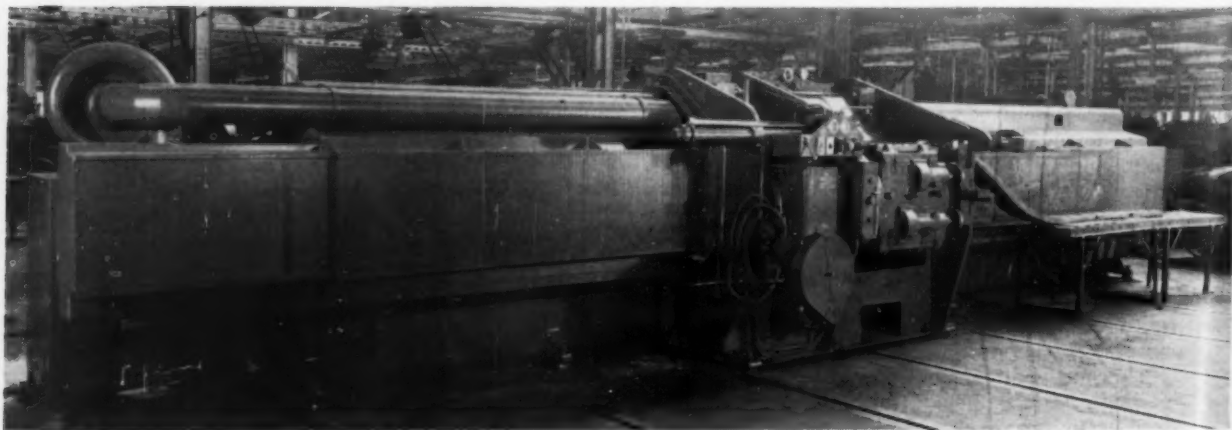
HORIZONTAL BROACHING MACHINE FOR BROACHING BOLT BOSS SIDE AND CYLINDER HEAD JOINT SURFACE ON L-HEAD CYLINDER HEAD
